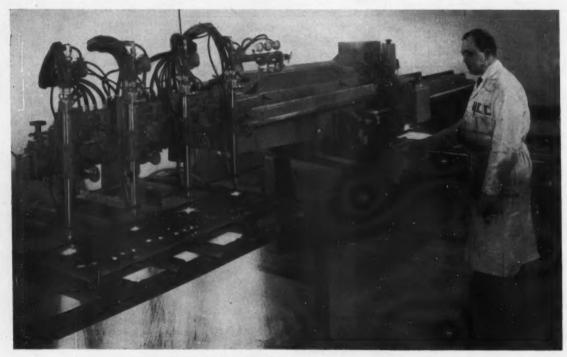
Oxweld 90-inch model dual-carriage shape-cutting machine
